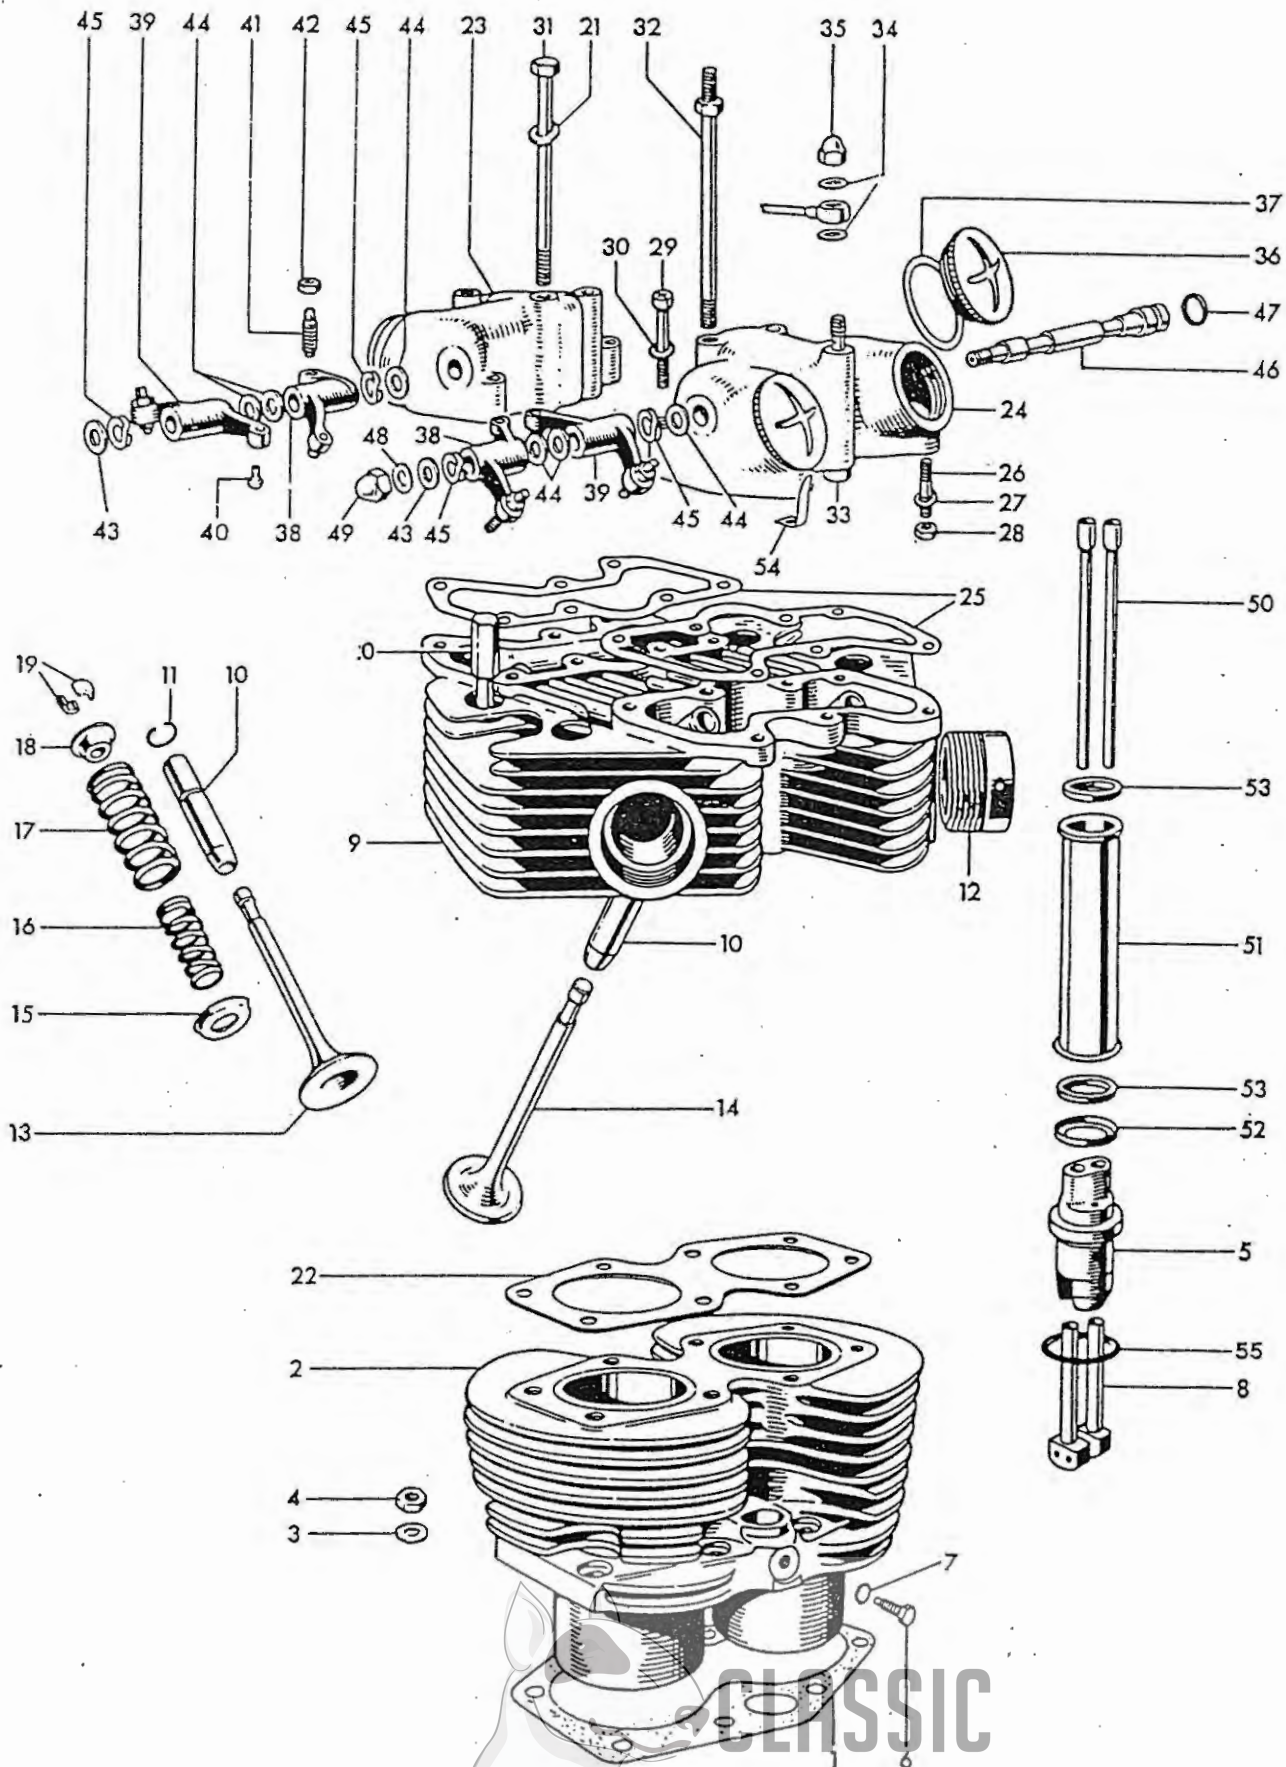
CYLINDER BLOCK AND HEAD, T90
